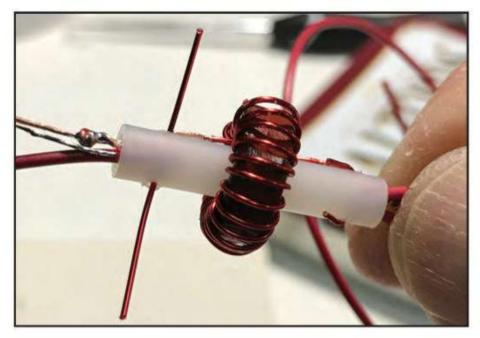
Photo F. Wire pin inserted through the end holes to secure the pigtail wires
